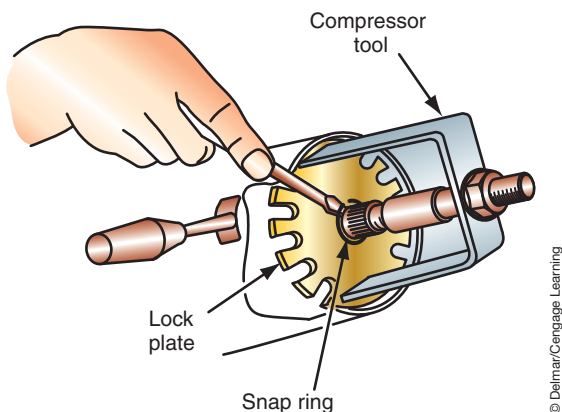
To remove the snap ring, use the compressing tool to relieve the pressure against the snap ring.
